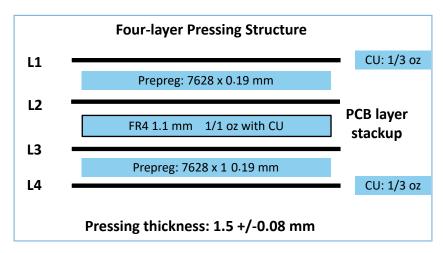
GR5526 PCB layer stackup (QFN68 package)
